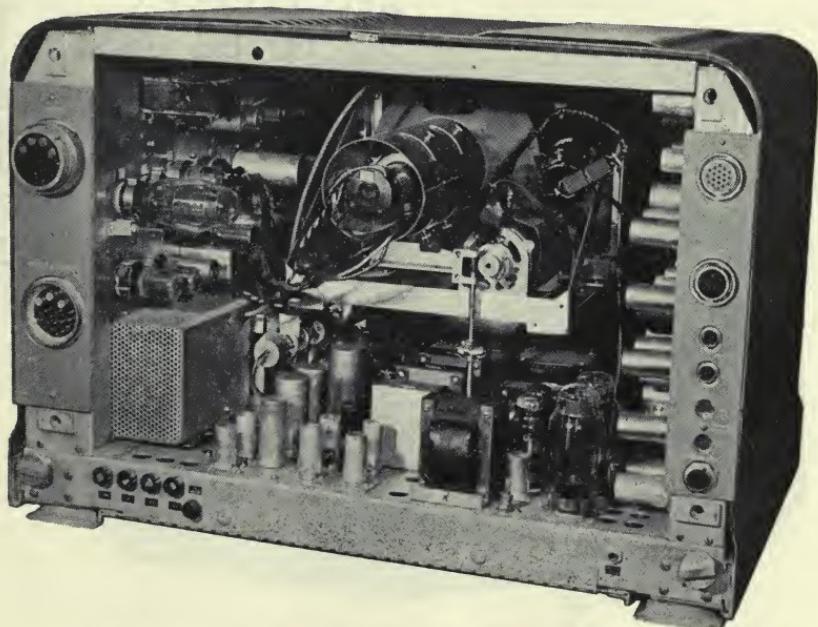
Rear view of Fig. 38 showing 3-chassis construction.
